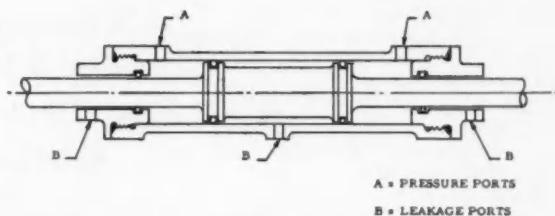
Seal test actuator with double-ended piston designed to permit collection and measurement of leakage flow past each of two shaft seals.
